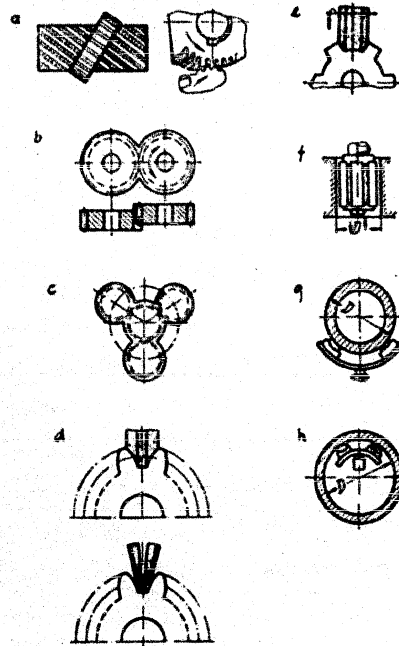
Excisions of transitions with indication of position of element and tool. (a) grinding teeth of gear; (b) generating teeth of gear; (c) fit-grinding teeth of gear; (d) grinding teeth of gear; (e) grinding slot; (f) honing hole of ϕD , rough (finished); (g) superfinishing cylinder (neck) of ϕD ; (h) superfinishing hole of ϕD
